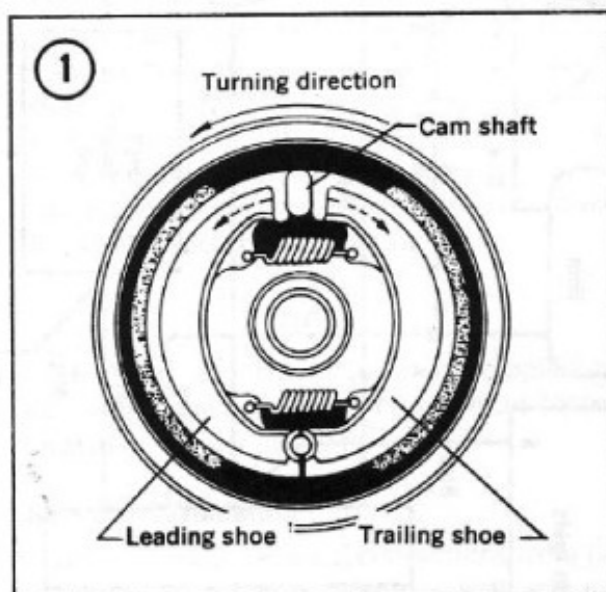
illustrates the major parts of the brakes. Squeezing the brake lever, on the handlebar, rotates the cam which in turn forces the brake shoes out into contact with the brake drum.
